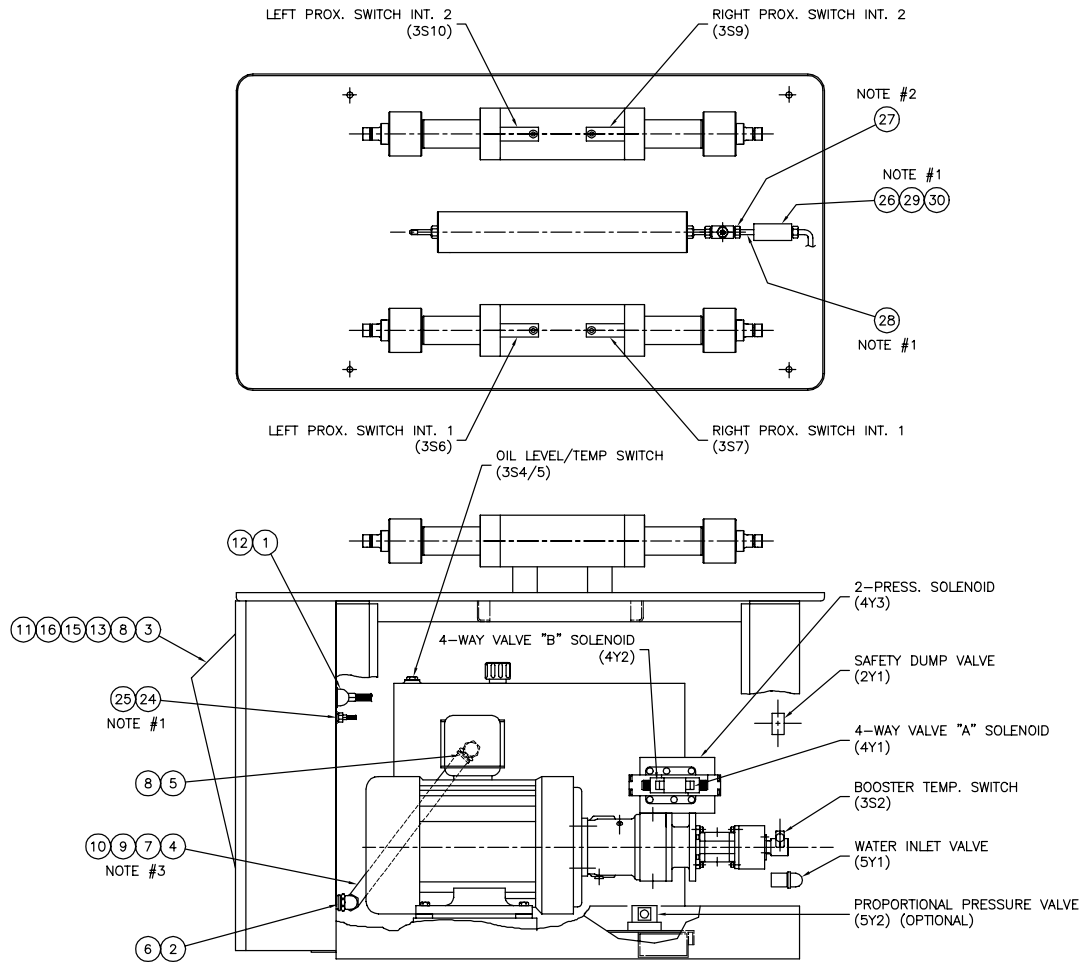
SL-4/100 hp, ELECTRICAL ASSEMBLY 200-208v/3/50-60-05145826
